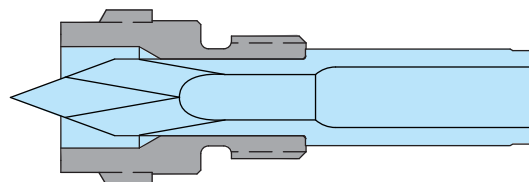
High Performance Thru Hole Tip Sub-Assembly, SXG5201
